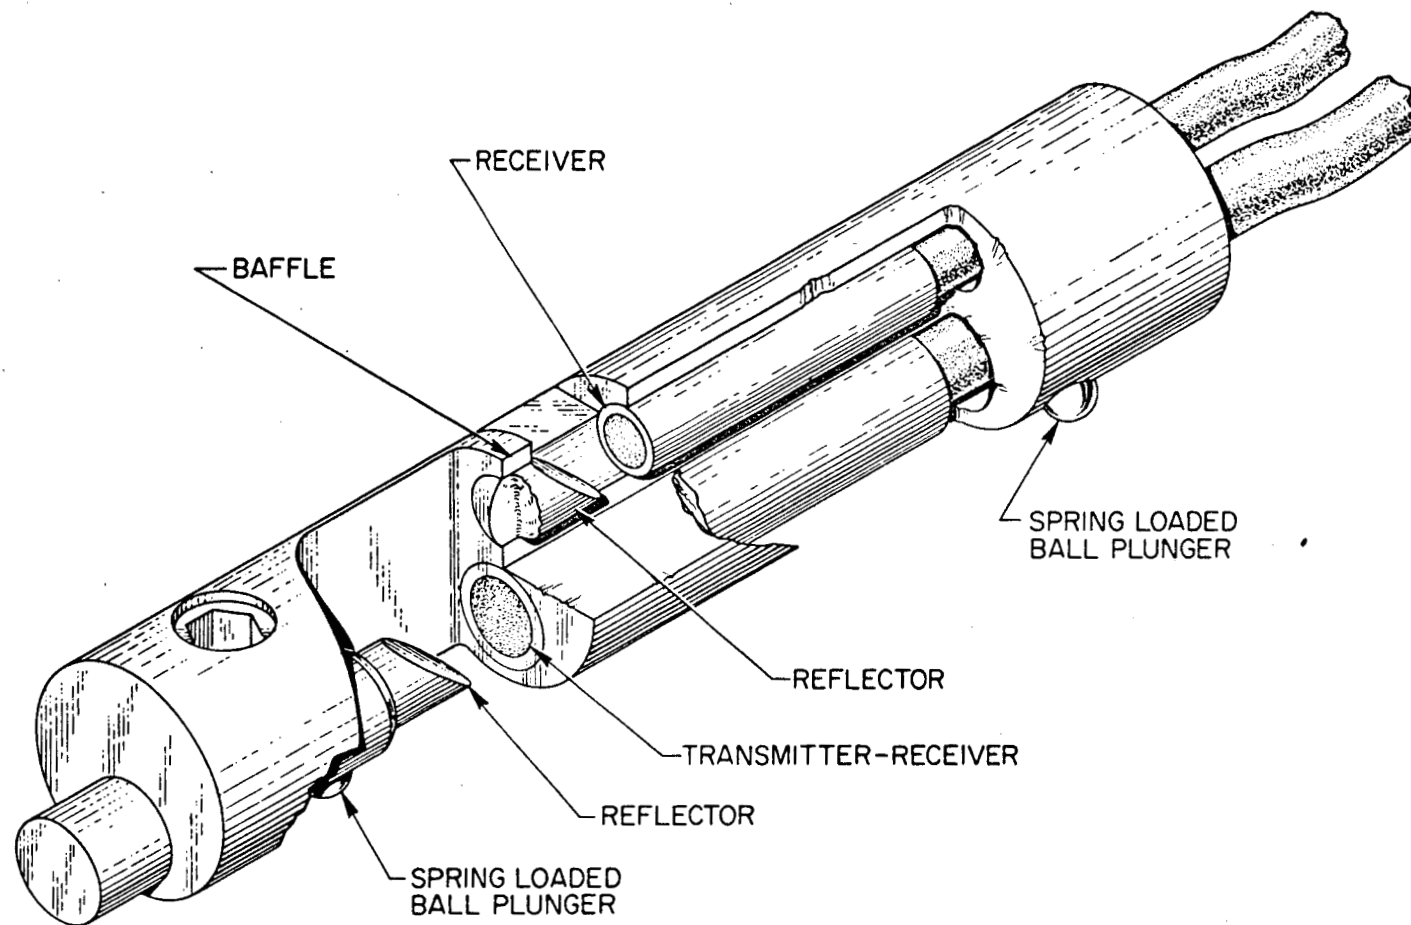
Isometric sketch of two-transducer ultrasonic probe for in-service inspection of CRBR tube-to-tubesheet welds.
